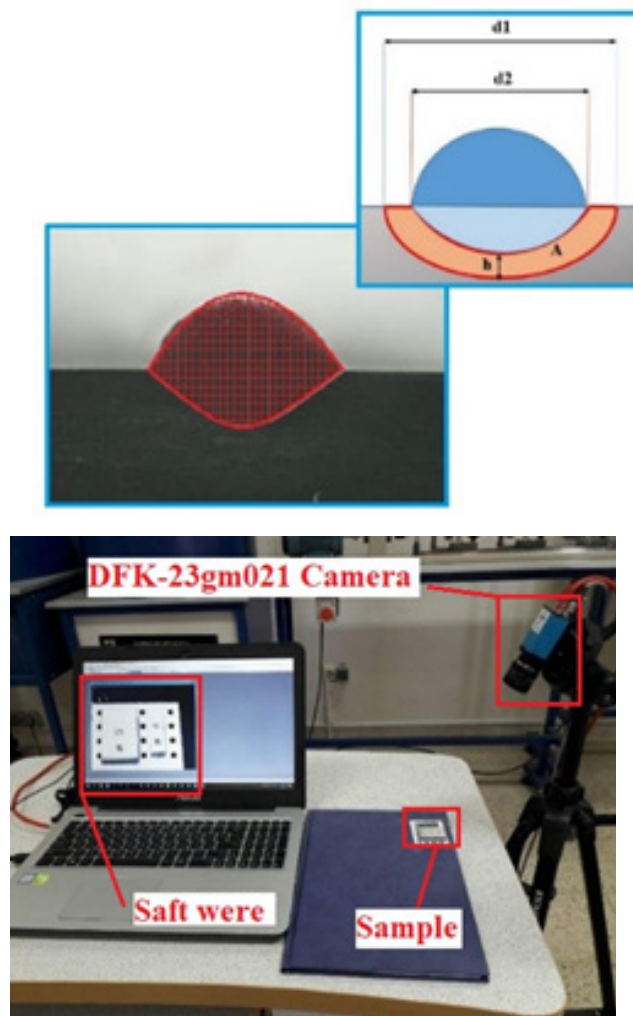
Image processing method of the cut section; a) classification of the weld geometry by NI vision software and b) block gauges for verification and modeling.
